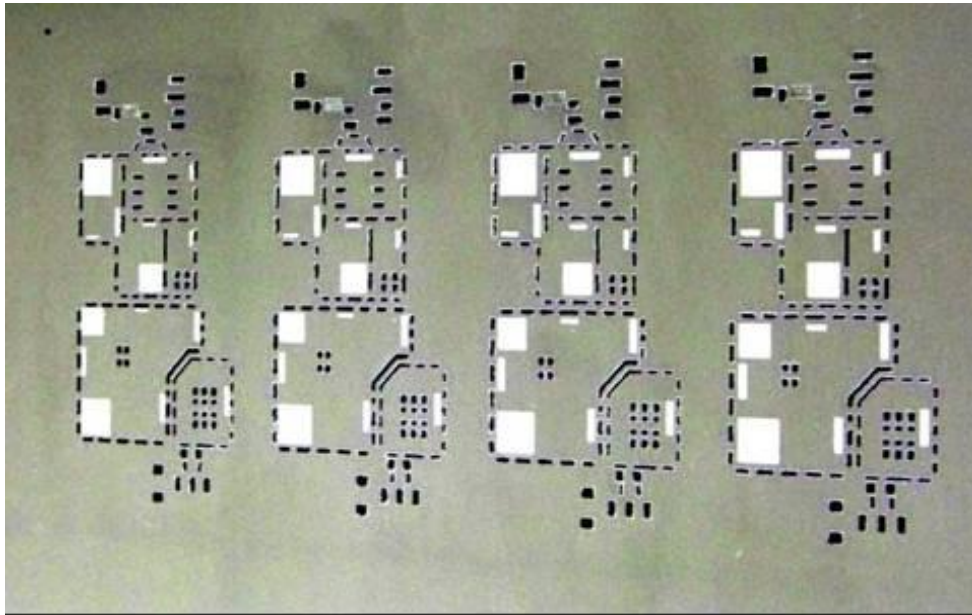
2nd Print Laser-Cut Chem-Etch Stencil
